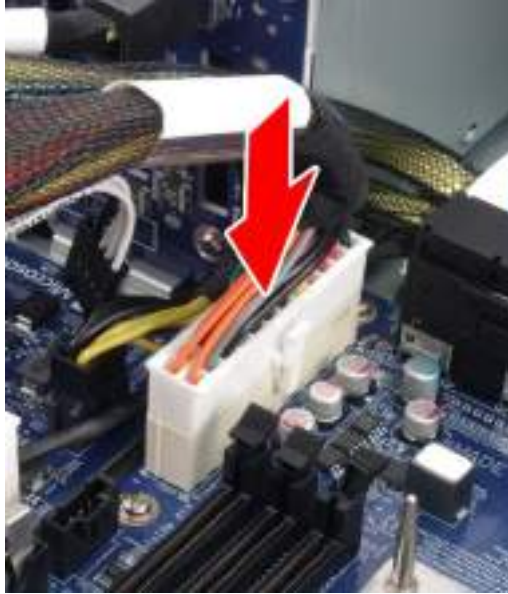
Install 24-Pin Mainboard-to-Power Connector onto Mainboard
